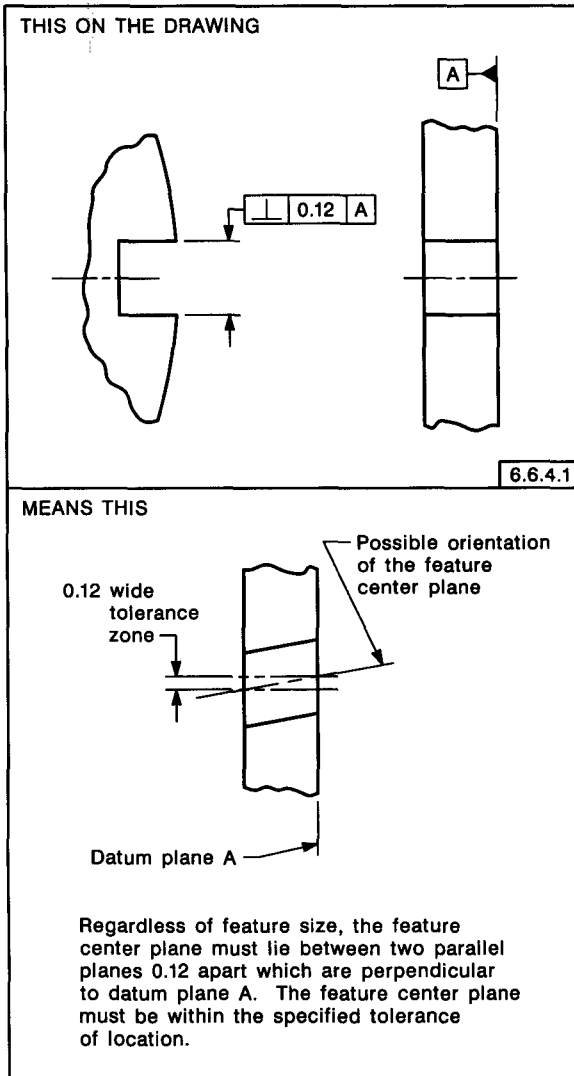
SPECIFYING PERPENDICULARITY FOR A CENTER PLANE (FEATURE RFS)
